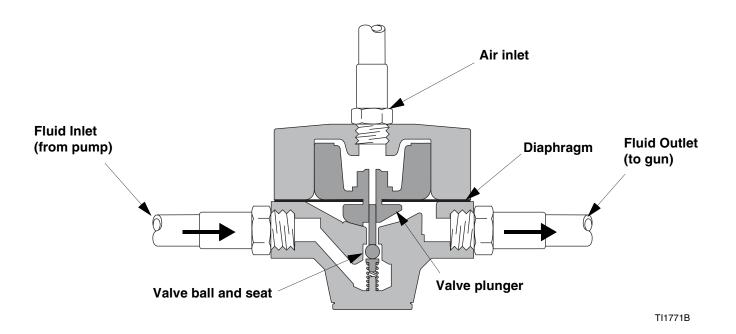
Cutaway of Pneumatic Fluid Pressure Regulator
